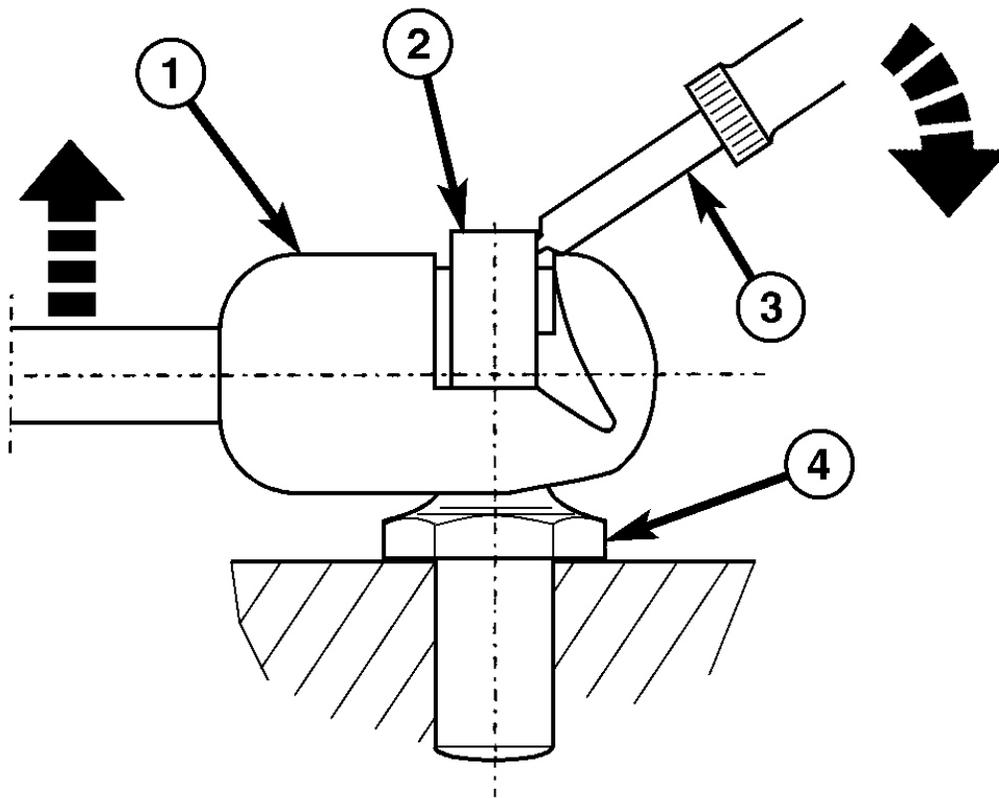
Removing/Installing Upper Support Cylinder Retaining Clip
